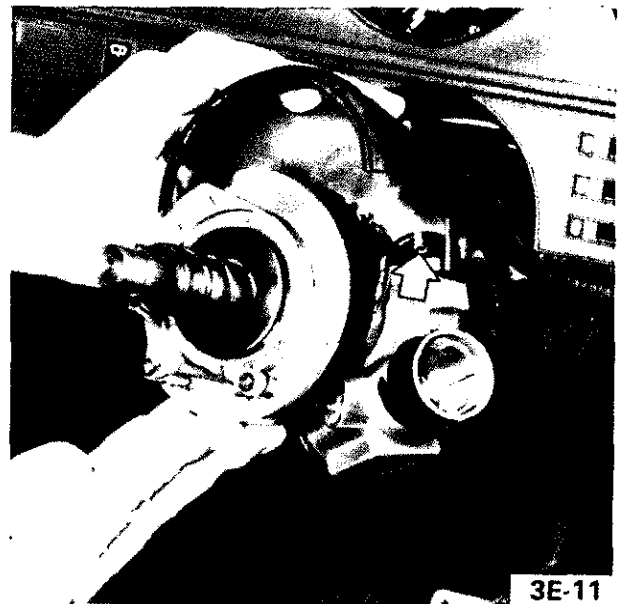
E-11 Removing Upper Part of Signal Switch Housing Cover
